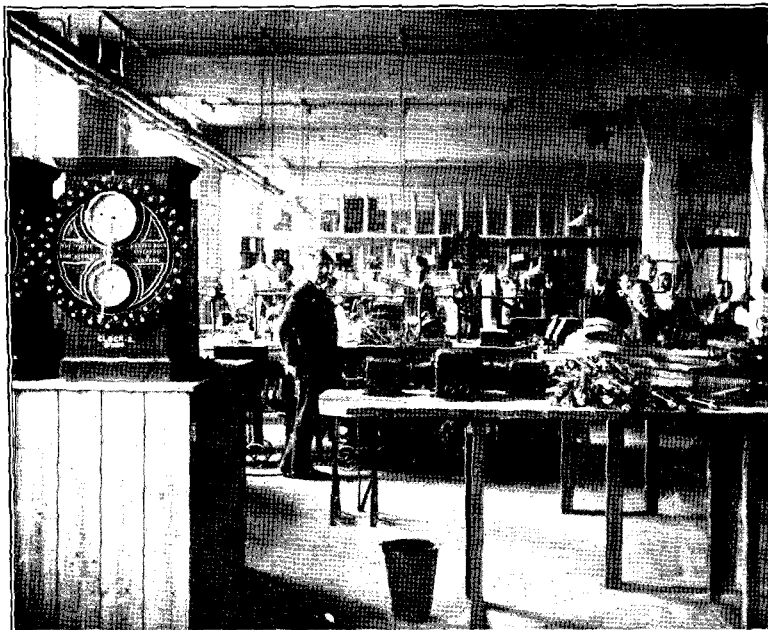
SECTION OF WORKSHOP (GROUND FLOOR).
